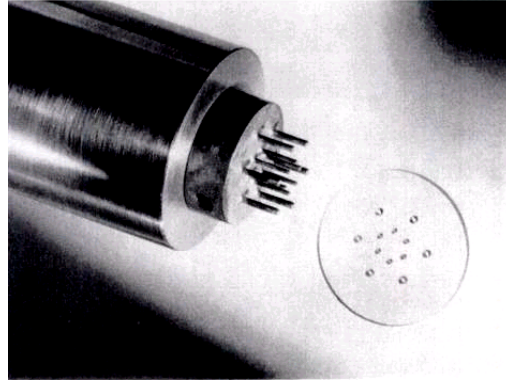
USM gang drilling tool for drilling 12 holes simultaneously
